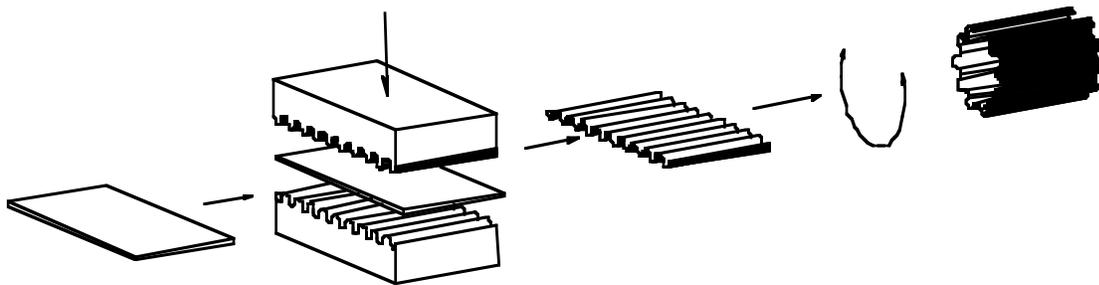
Schematic of process for fabrication of test specimens. It involves cold stamping to introduce corrugations on foil material followed by welding to obtain a closed cylindrical geometry.
